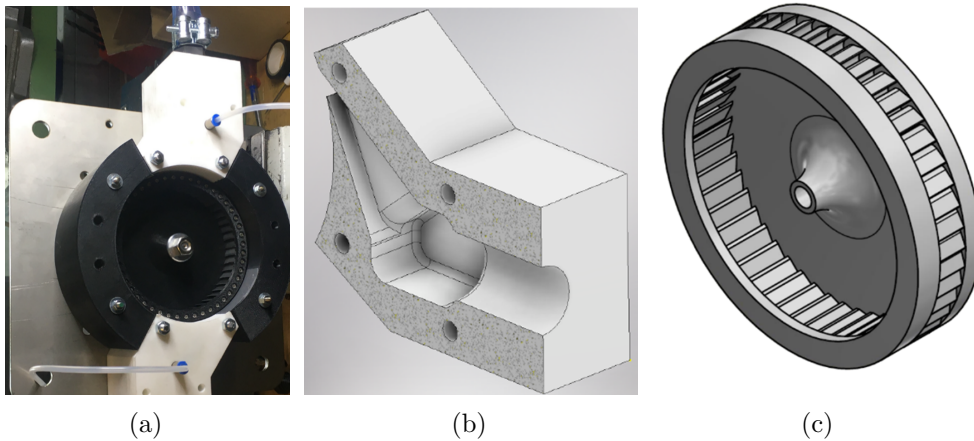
A photograph of the (a) assembled radial turbine; for the sake of clarity, without the lid, (b) the turbine nozzle cutaway and (c) the turbine rotor; both parts 3D printed
